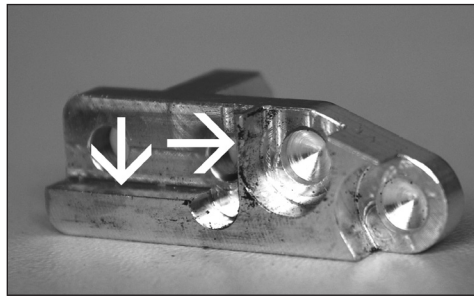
Contact surfaces for side surface and bottom of the metal strip
